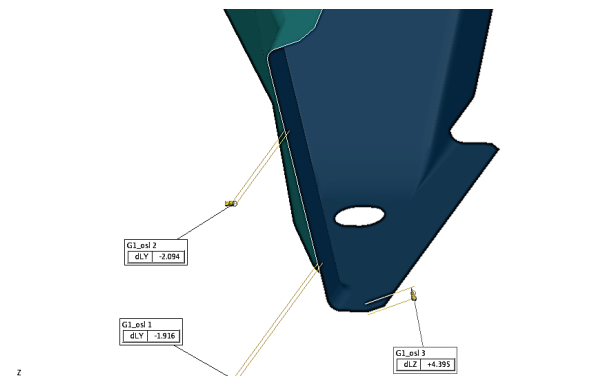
Deviations of tool parts used for constraining of rear axle suspension bracket in comparison to the CAD model
